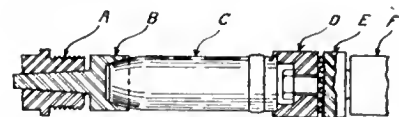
CHUCK AND BALL-BEARING CENTRE.
